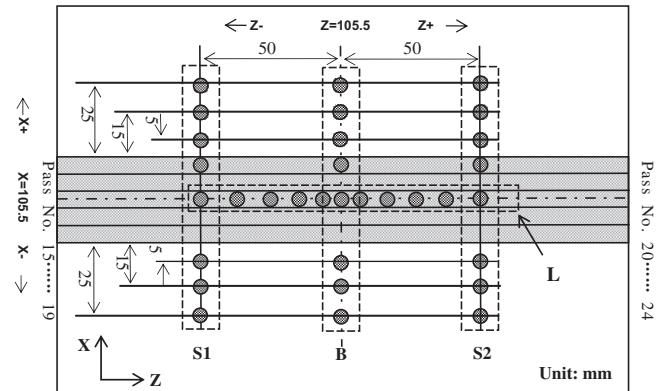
Arrangements of strain gauges on the top surface of welded joint.
